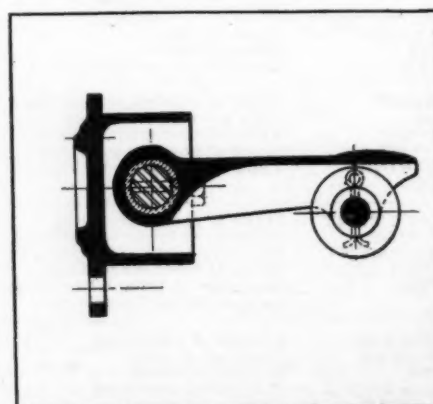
Section of the valve tappet lever, showing a roller which presses against the cam and the pin on which the lever oscillates.
